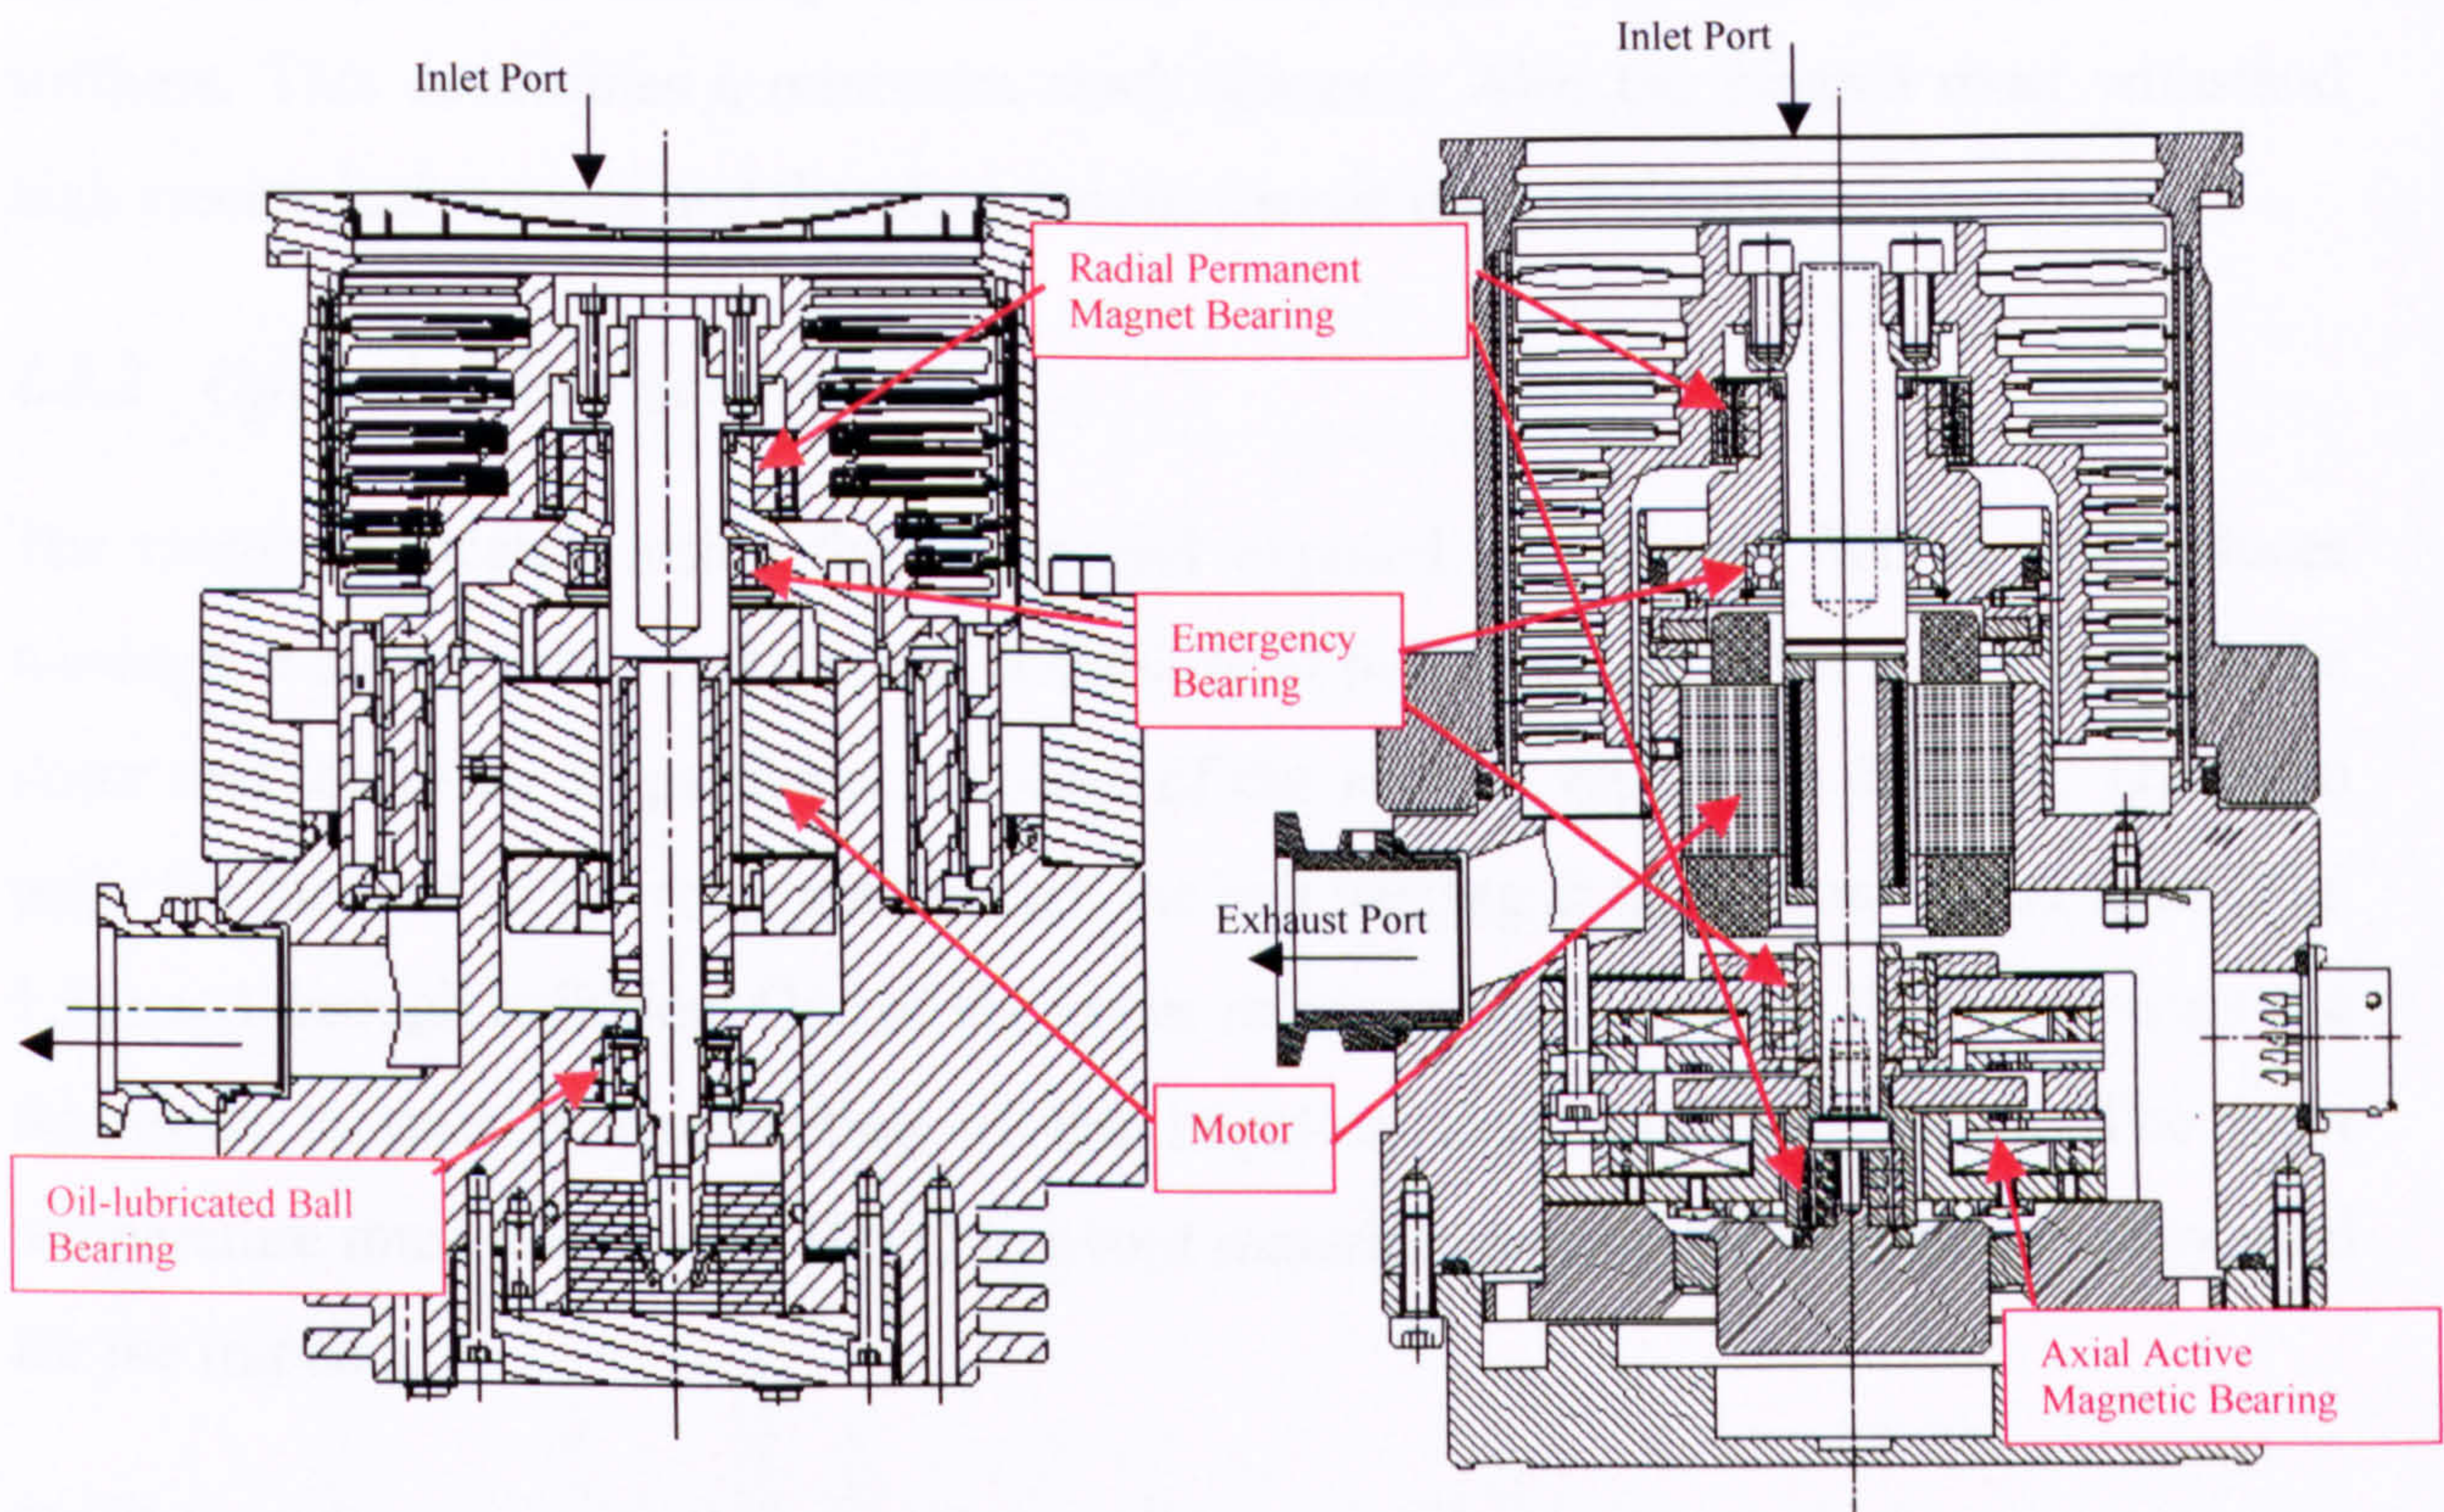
Cross-section of a turbomolecular pump with a) hybrid bearings, b) magnetic bearings [8]
